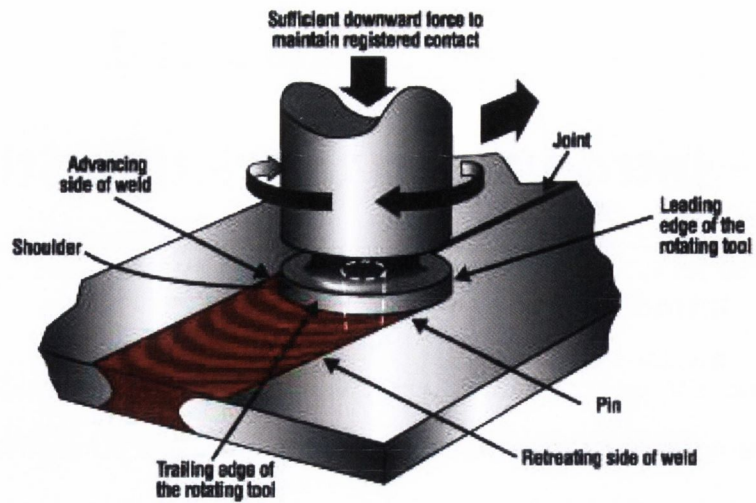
An overview of the Friction Stir Welding Process [2]
